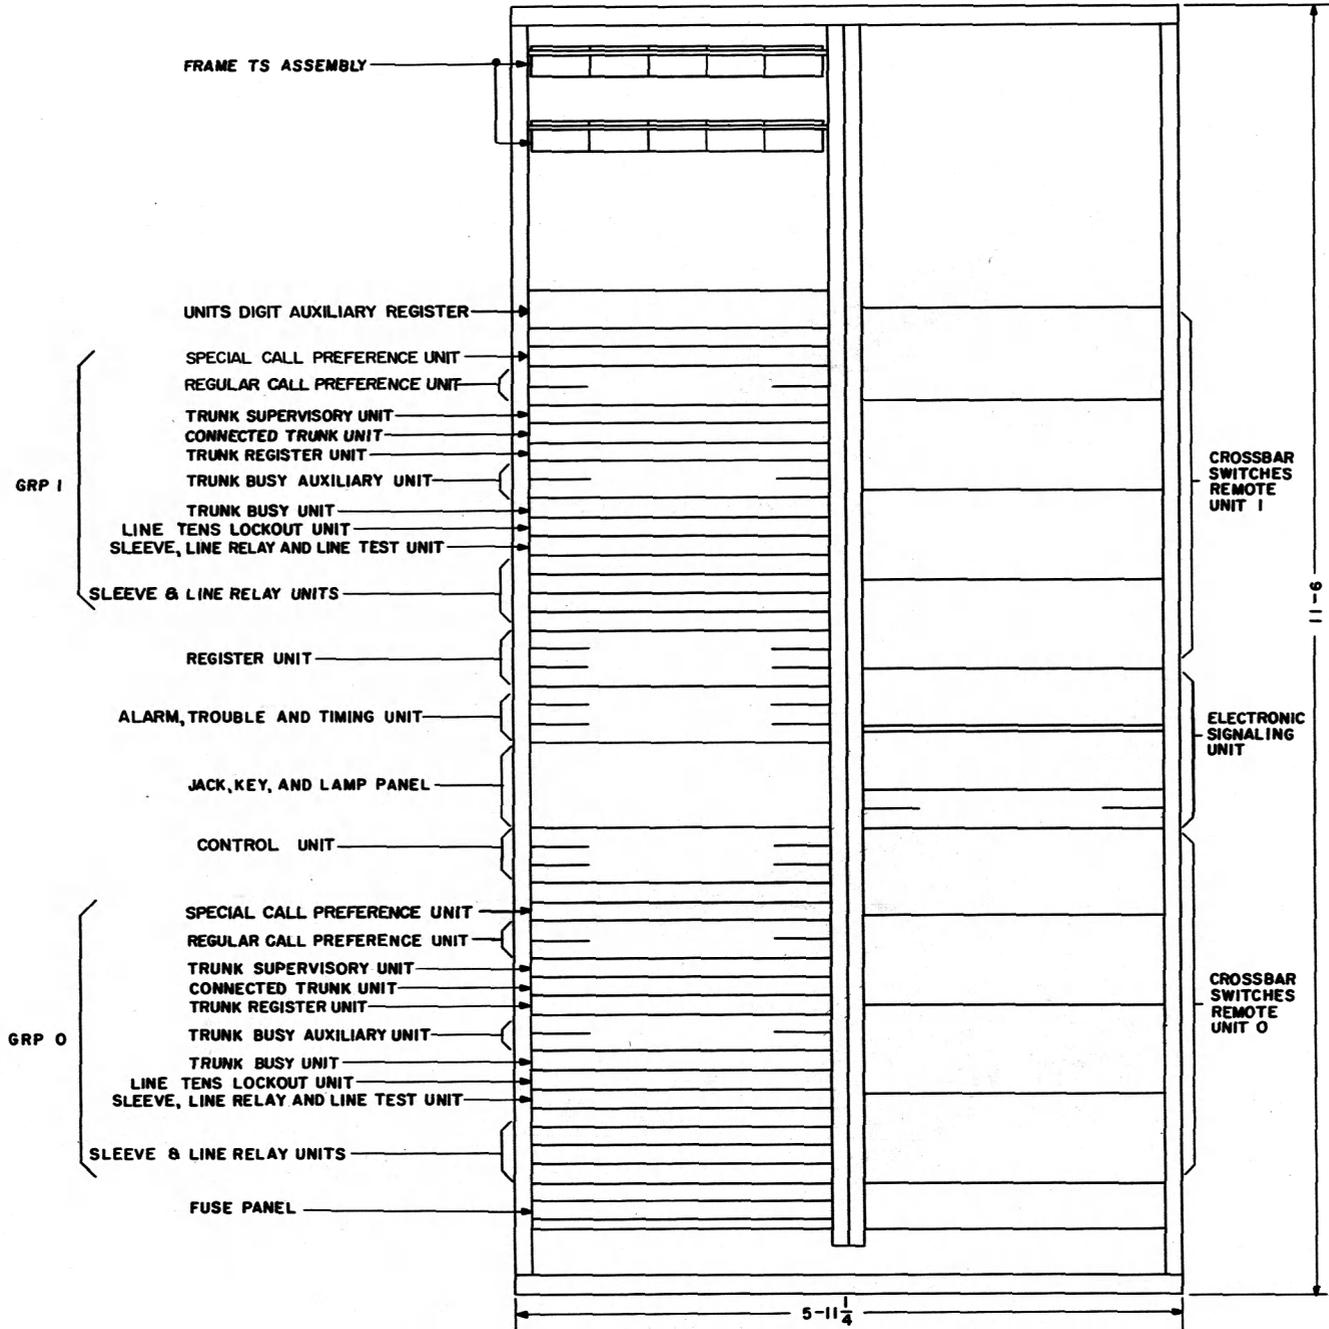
Control Unit Equipment Arrangement (Front View)
